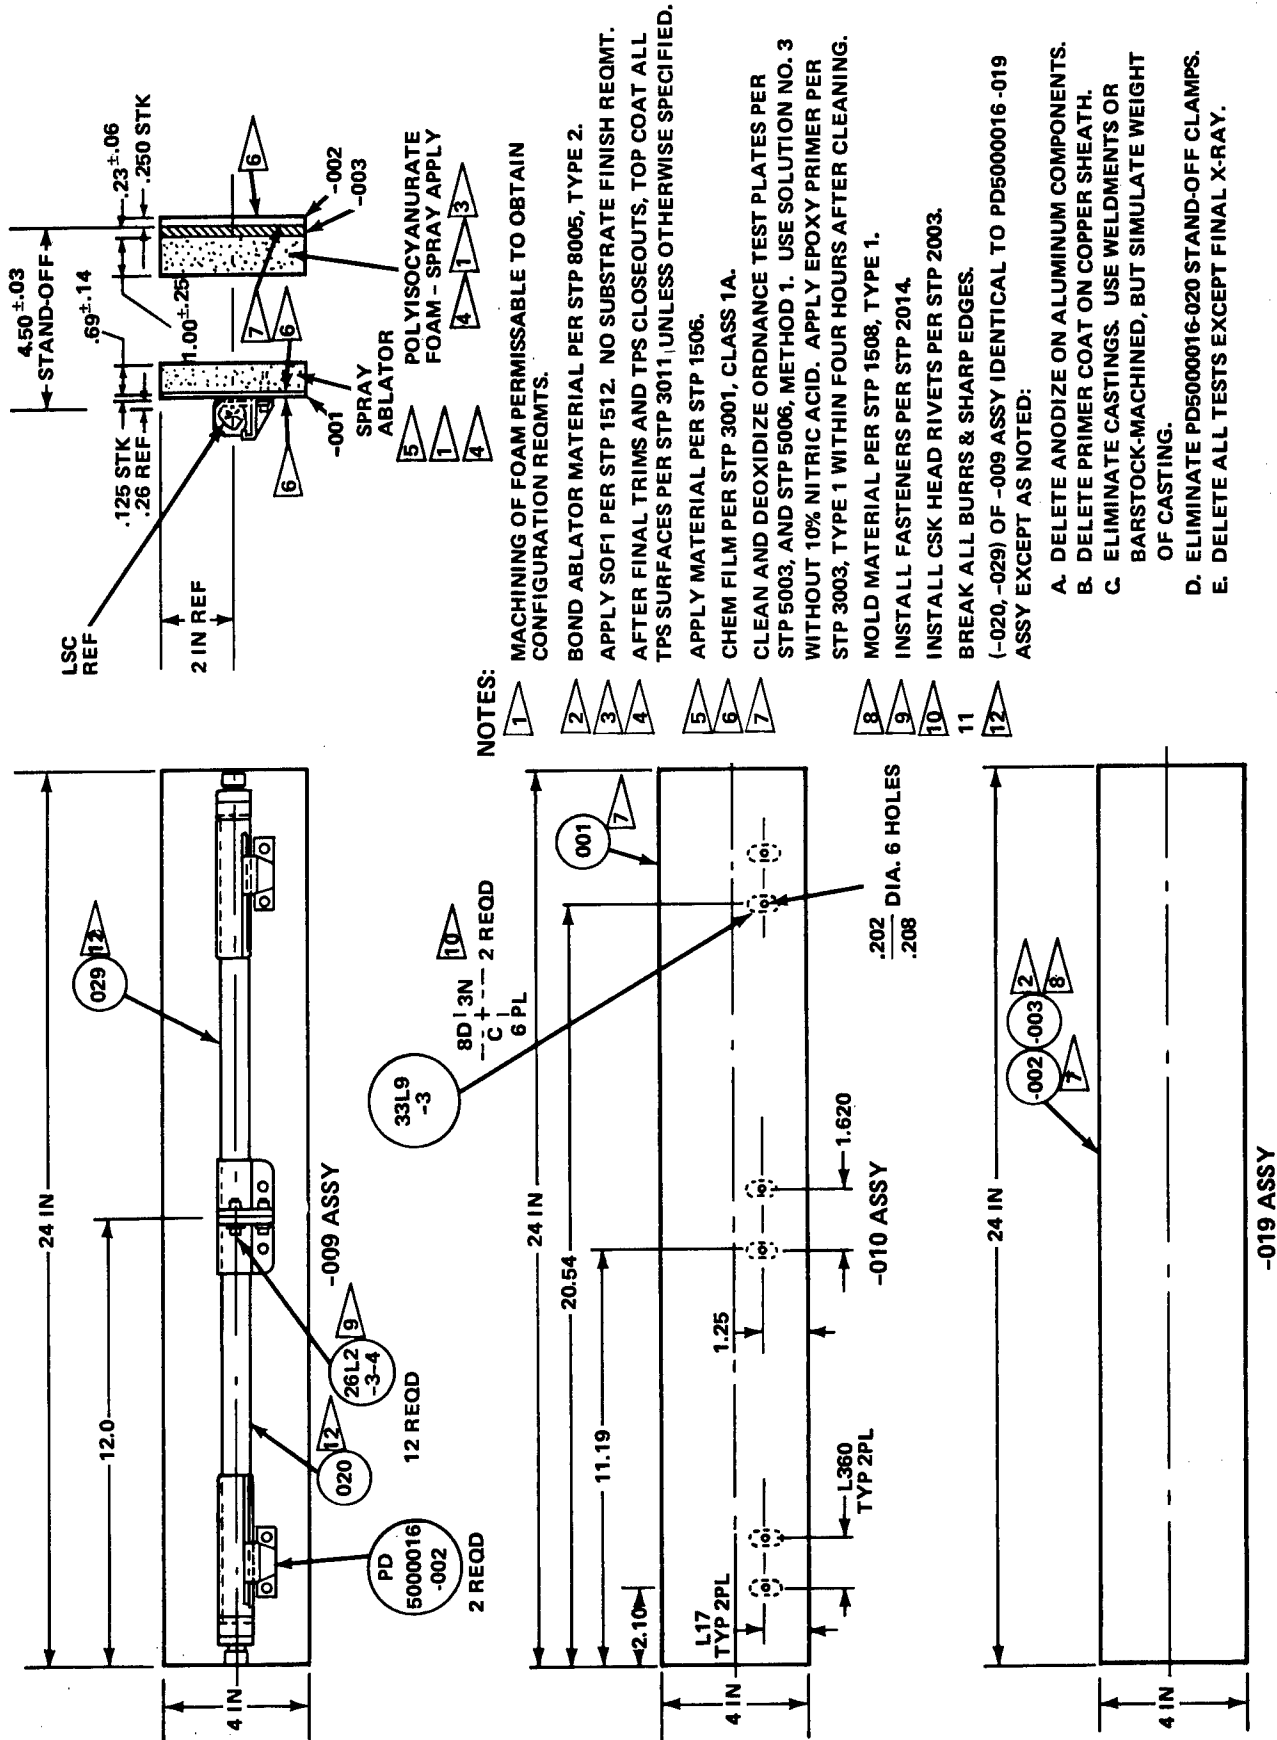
DIMENSIONAL DETAILS OF LSC TEST ASSEMBLY
